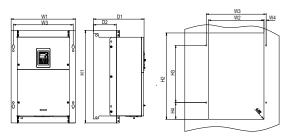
Flange mounting of VFDs of 3PH 380V (90-110kW)
